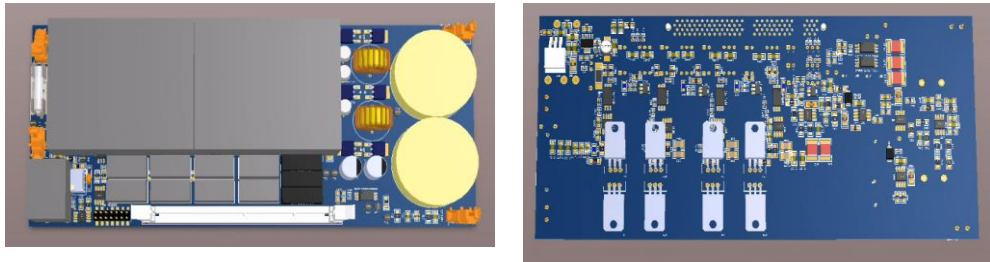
(a) Top view of one module 3-D prototype (b) Bottom view of one module 3-D prototype
